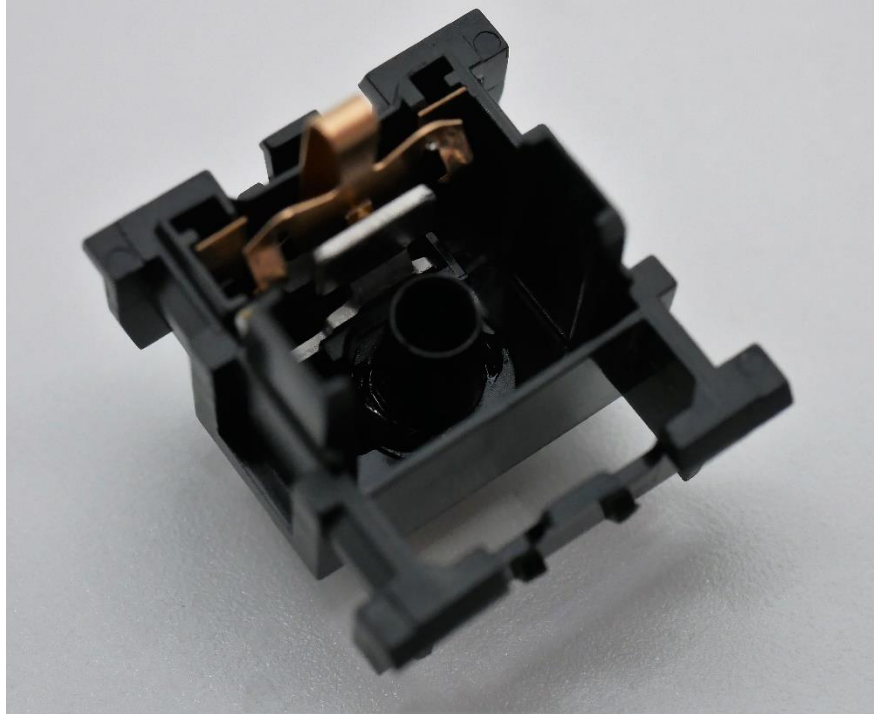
Novelkeys Cream+ bottom housing internal design showing small mold ejector marks around upper lip, wide open LED slot, and subtle lubrication at base of center pole.
